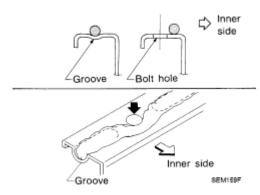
Applying Bead Of Sealant To Bolt Holes Courtesy of NISSAN MOTOR CO., U.S.A.
